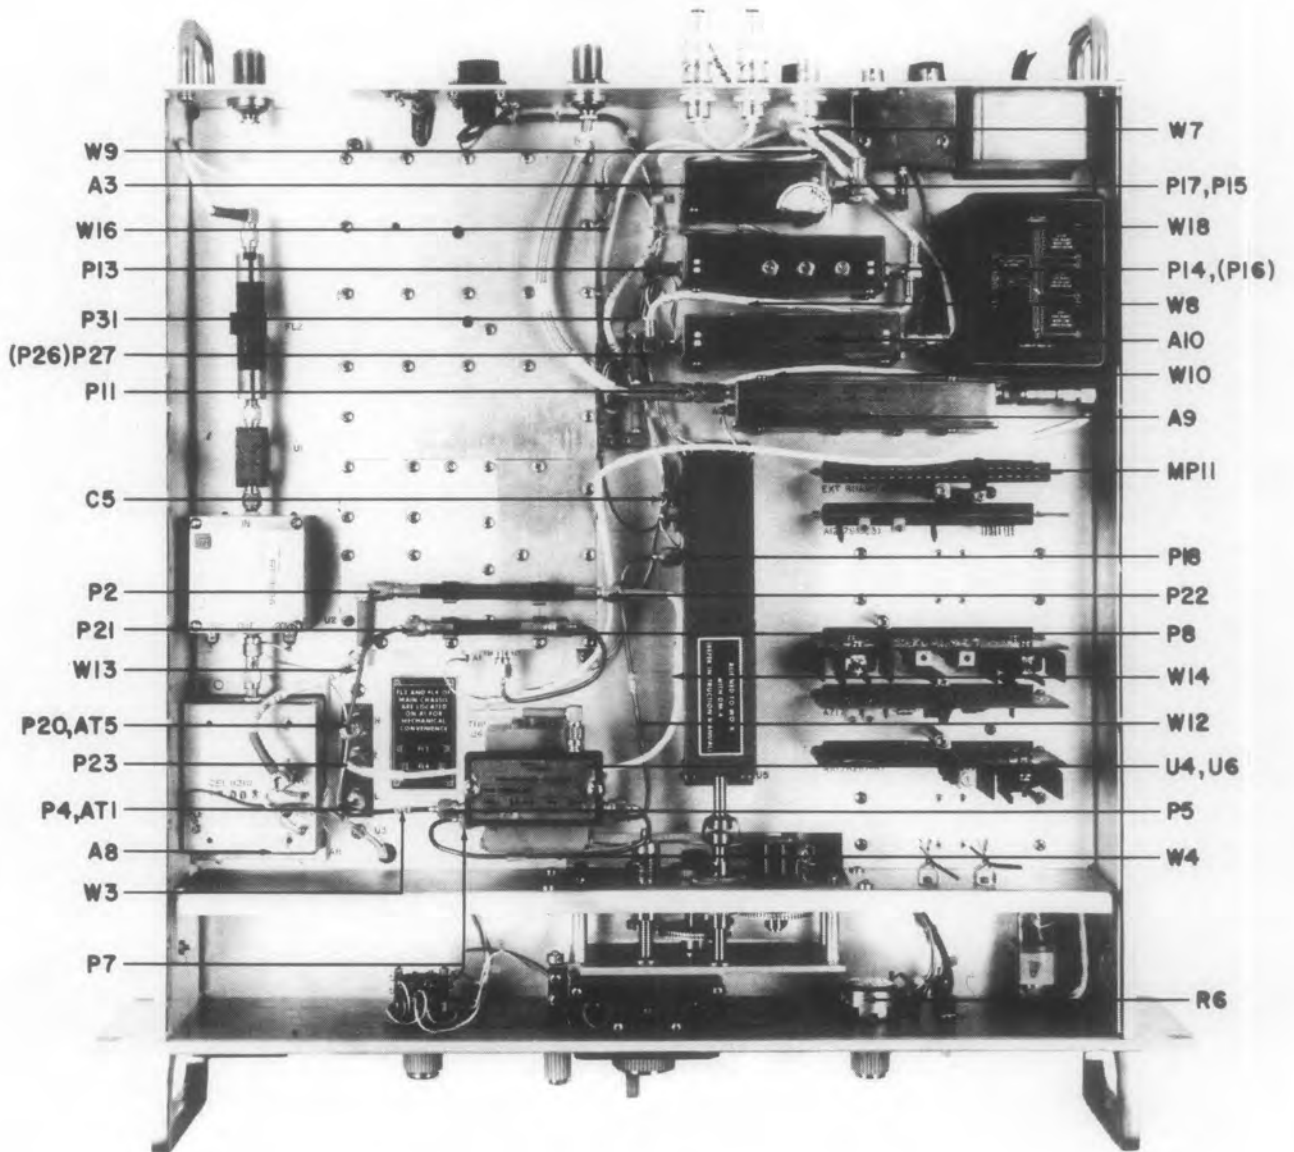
Type WJ-9080A Tuner, Top View, Location of Components
